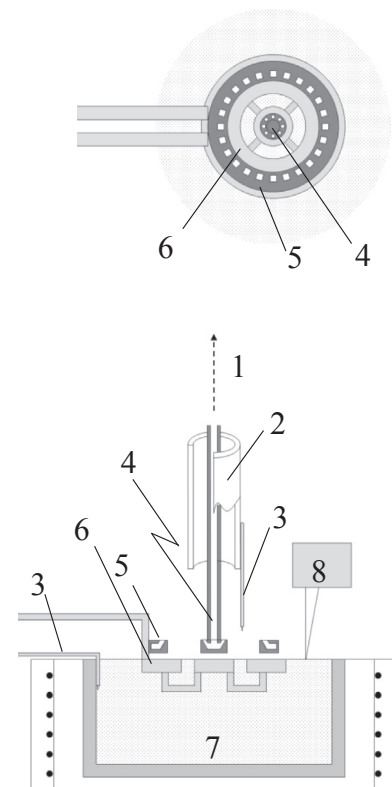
Schematics of the apparatus. 1) pulling path, 2) starting device, 3) thermocouples, 4) inner cooling nozzle, 5) outer cooling nozzle, 6) shaping device, 7) melt, 8) laser distance sensor.
